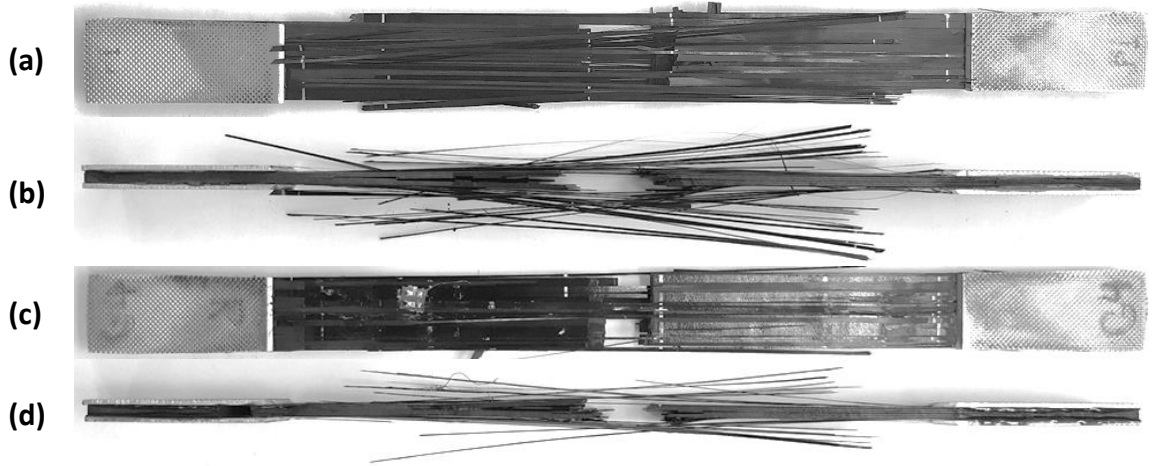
Tensile failure of specimens with BVID. Top view (a) and side view (b) of P-specimen, and top view (c) and side view (d) of G-specimen.
